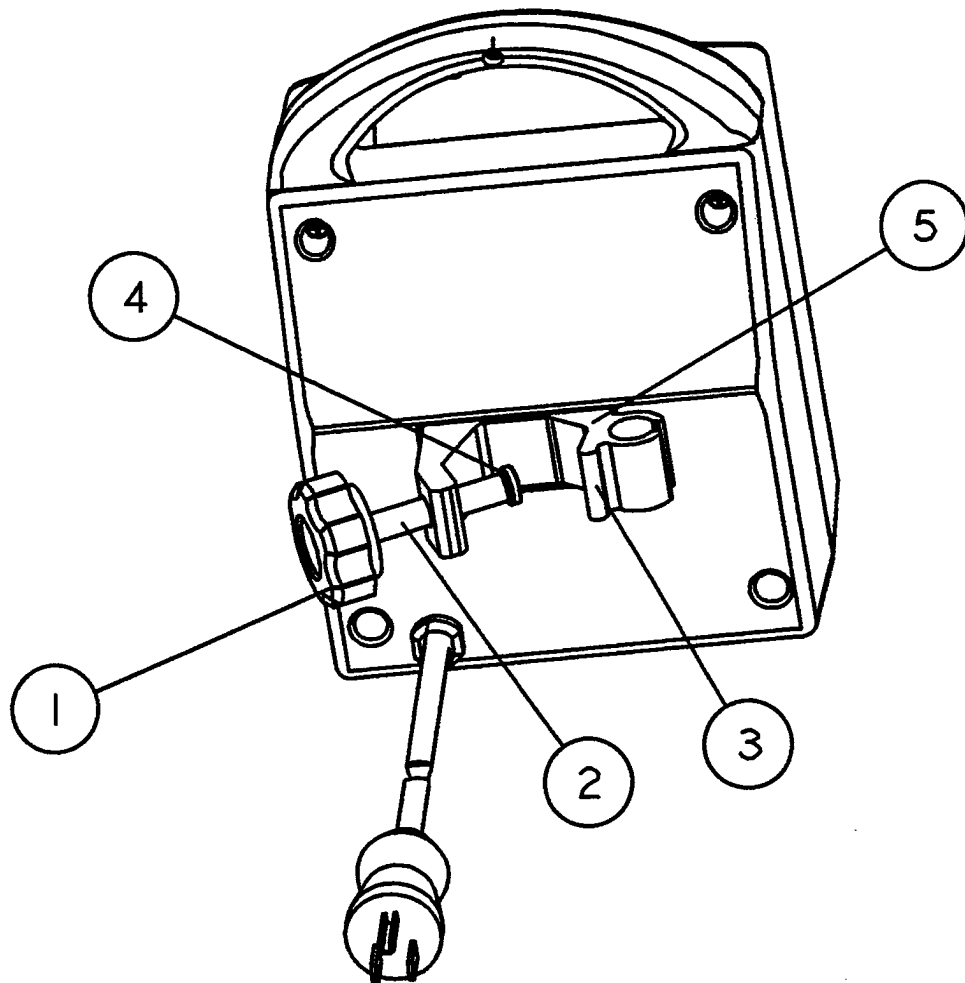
Pole Clamp Knob/Screw Assembly and Tip Insert Replacement
